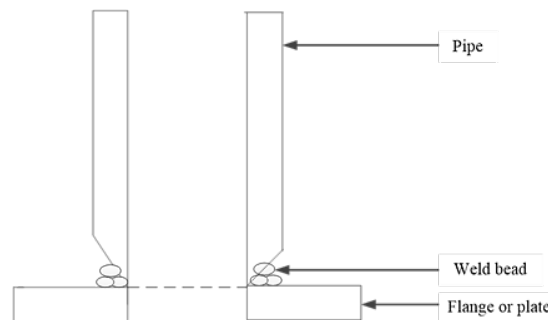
Schematic diagram of as-received ASTM A516 Grade 70 steel plate welded to ASTM A106 Grade B pipe
